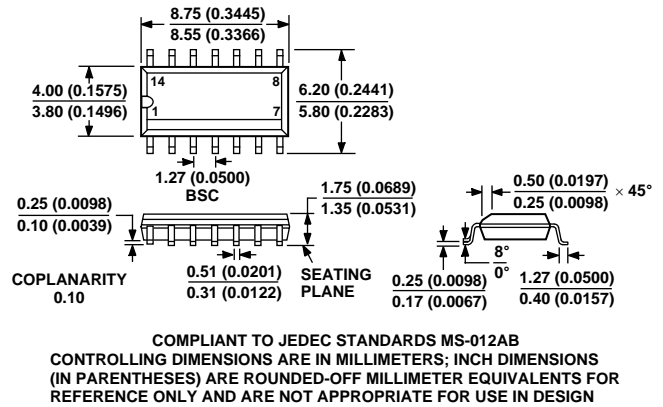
14-Lead Standard Small Outline Package [SOIC] (R-14)
